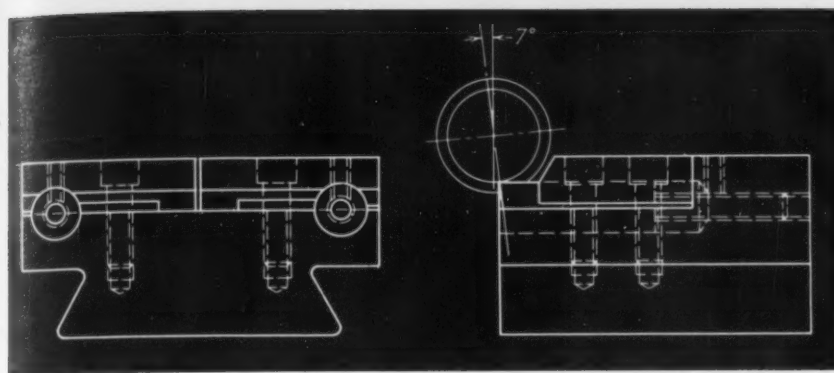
Typical tool holder designed by Ford for main transmission shaft machining on automatic screw machines.
